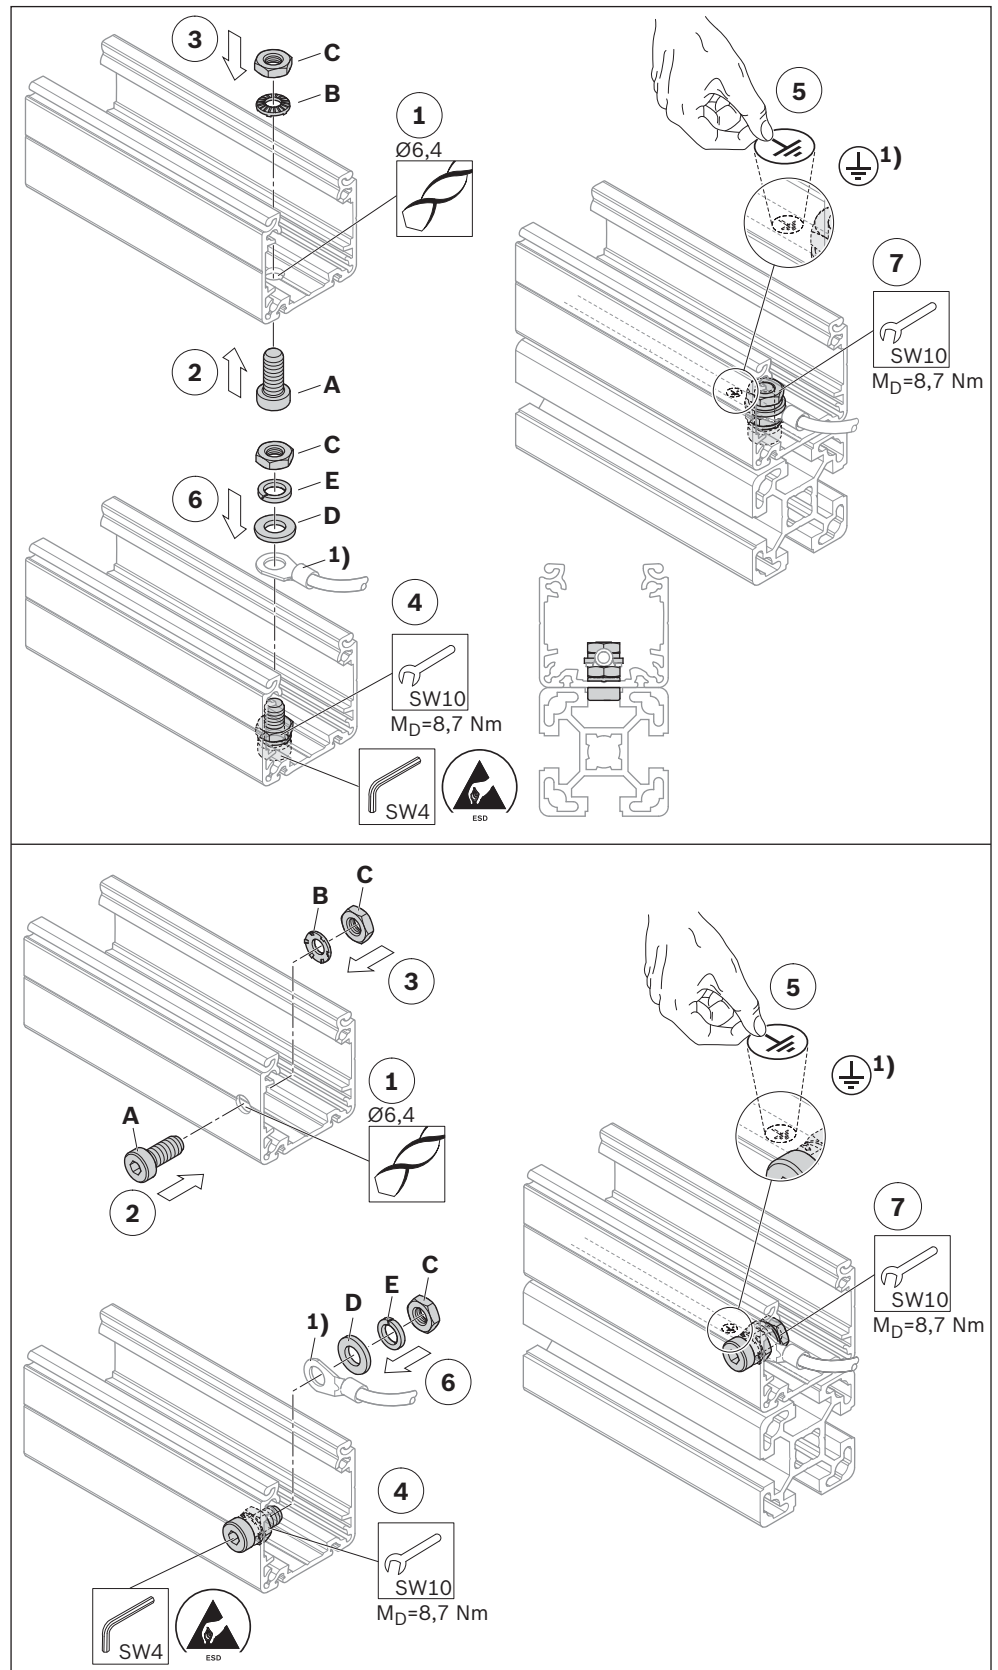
Equipotential bonding, mounting in floor/wall of the cable duct
